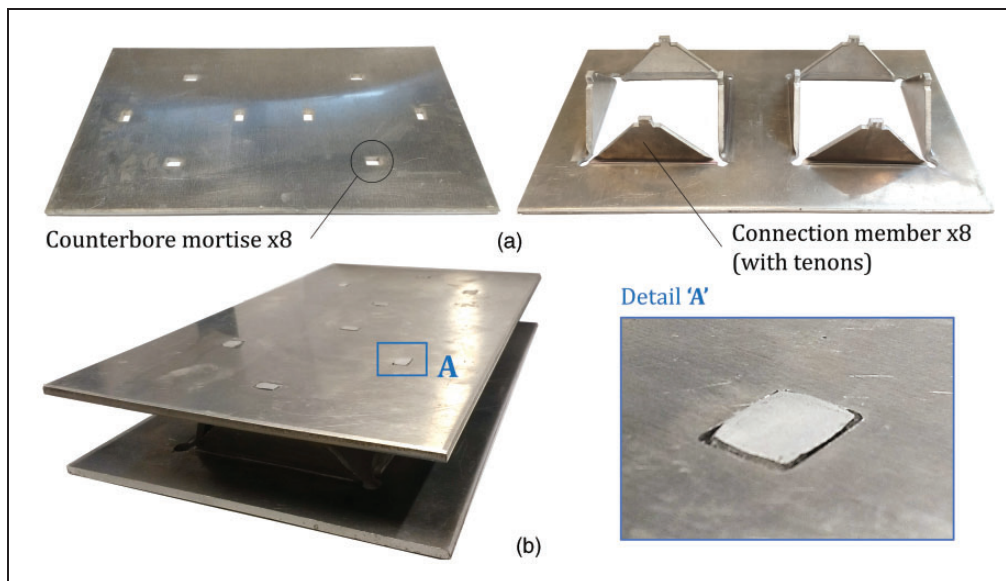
The new aluminum sandwich panel assembled through joining by forming: (a) top and bottom sheets showing the mortises and the connection elements of the core containing the tenons; (b) the final panel after assembly with a detail of the mechanical interlocking.
